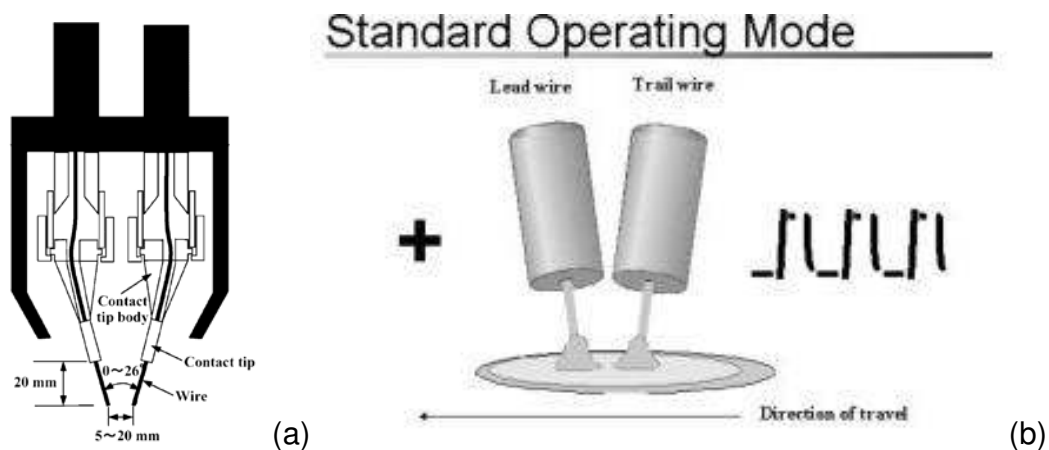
, Sectional view of tandem torch (a) and operating mode (b) [12]
